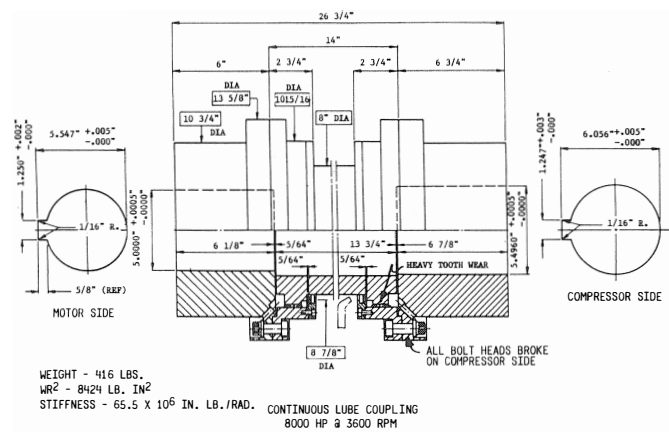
Continuous Lube Coupling, 8000 hp/3600 rpm.
